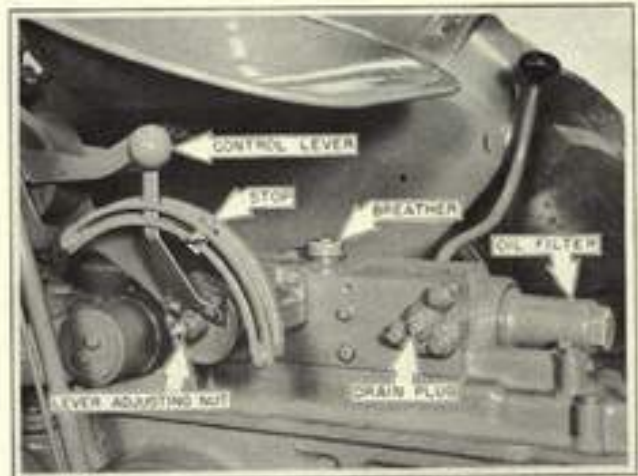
Hydraulic Control Lever, Breather, Drain Plug And Filter
